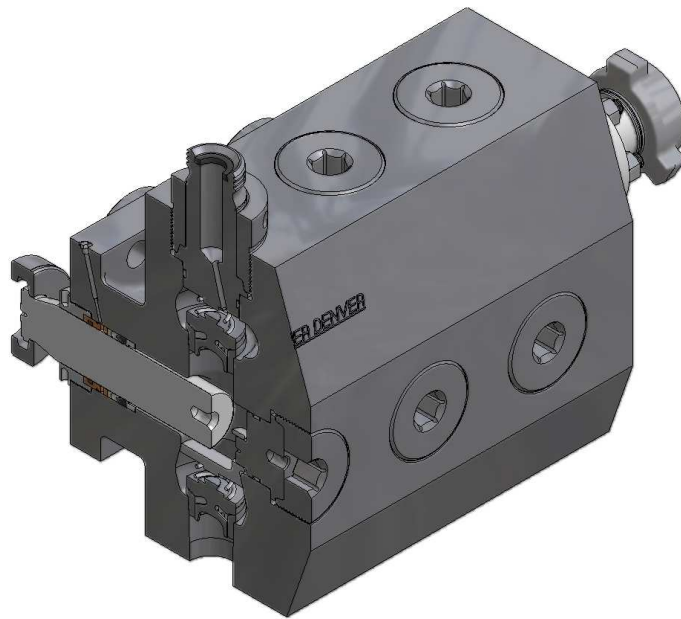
SUPER GWS FLUID CYLINDER SECTIONED ISO VIEW
